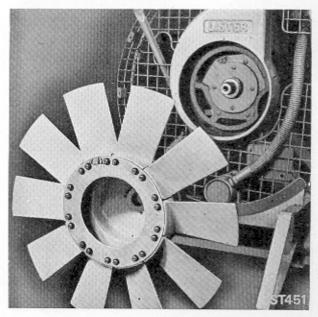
Fan Rotor and Flywheel (M.E.U.)
